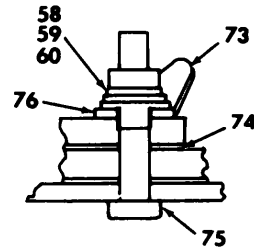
Circuit card assembly, AC input, A2 (sheet 1 of 2)
